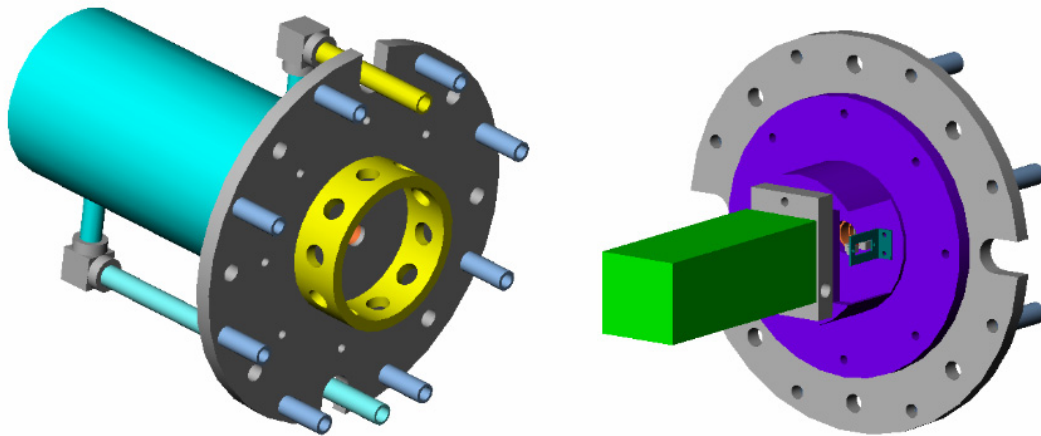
Left: Image of the Motor assembly encased and locating components. Right: Image showing the Electric motor and infra red sensor mounting bracket.
